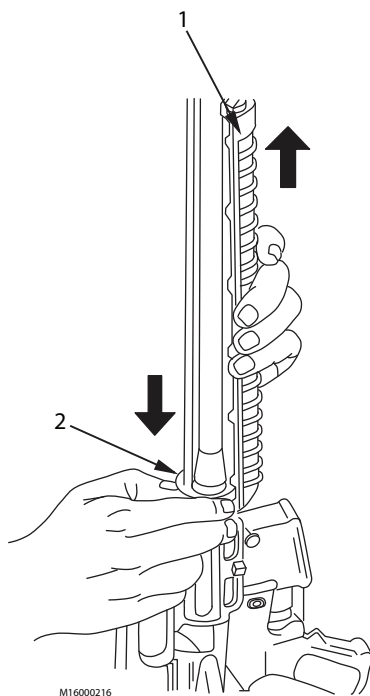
Removal of Lower Handguard Assembly (M16A2).
